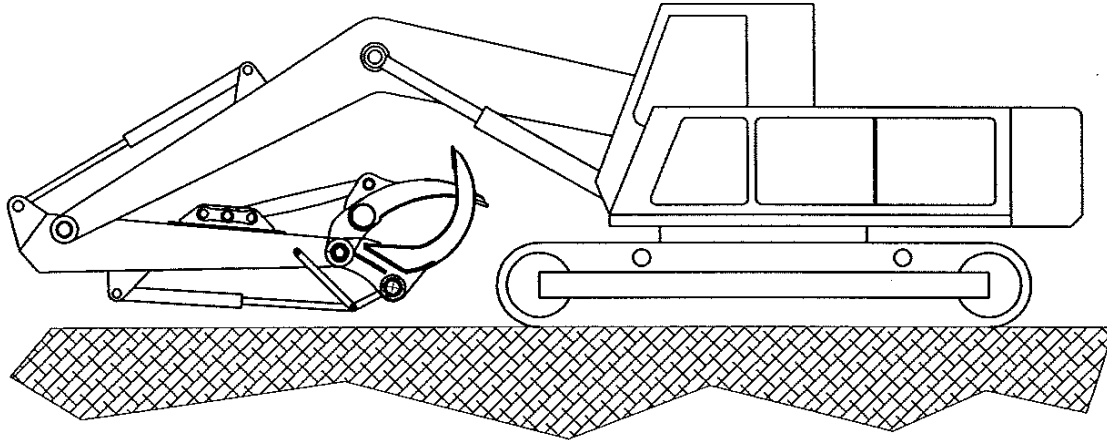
Carrier Positioned to Weld Mounting Pad
